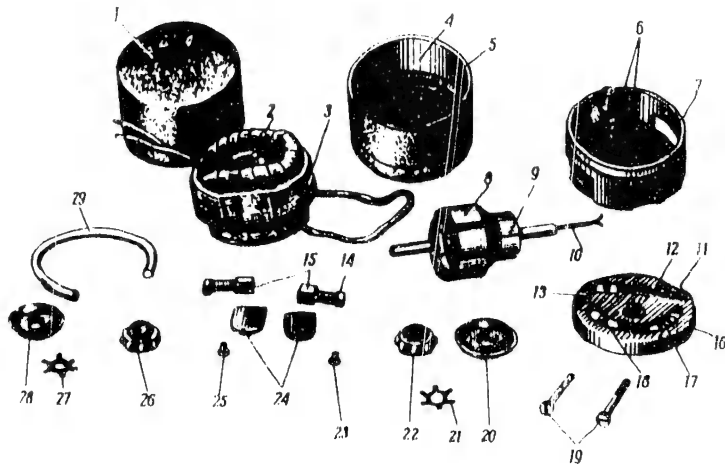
ELECTRIC MOTOR JU-4M (DISASSEMBLED)
